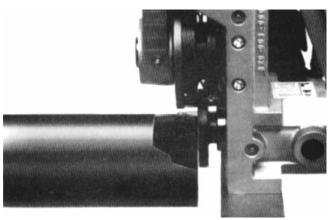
Close-Up of Pipe Against Drive Roll Flange
